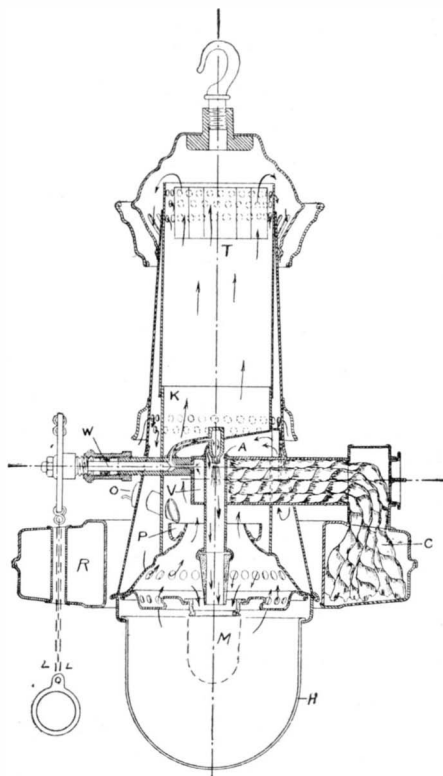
SECTION THROUGH COHN HANGING LAMP SHOWING INTERIOR CONSTRUCTION.
